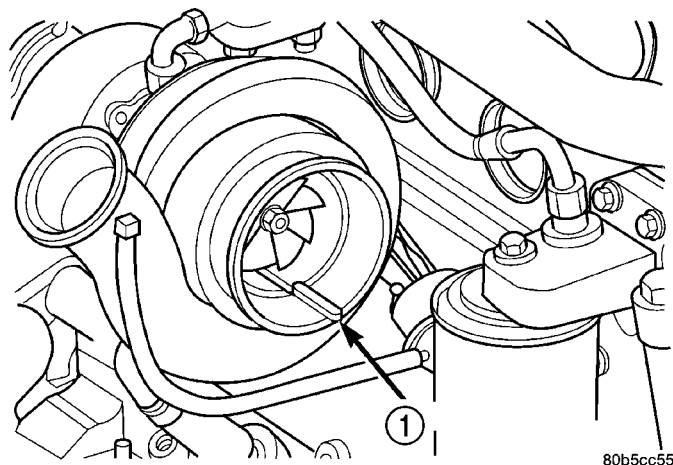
Measure Turbocharger Bearing Radial Clearance
